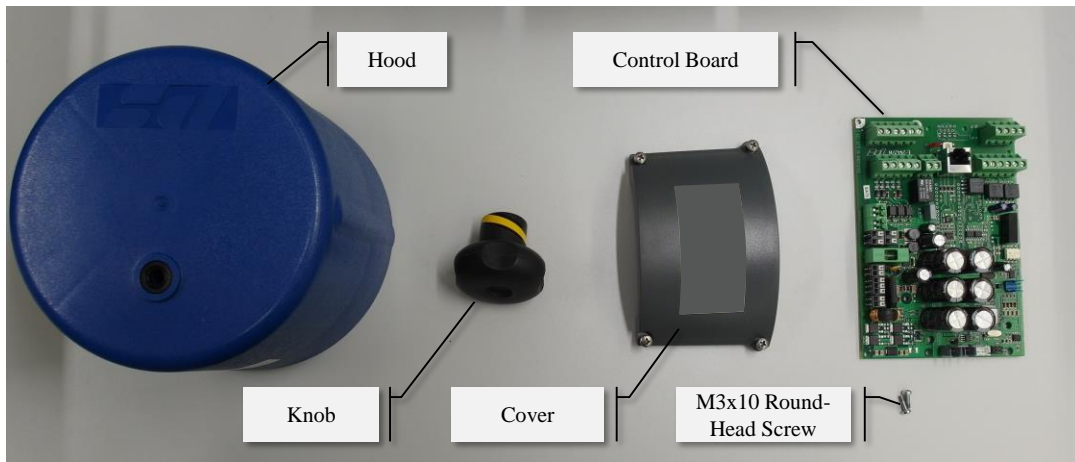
Actuator drive consisting of six parts (actuator body not shown)
